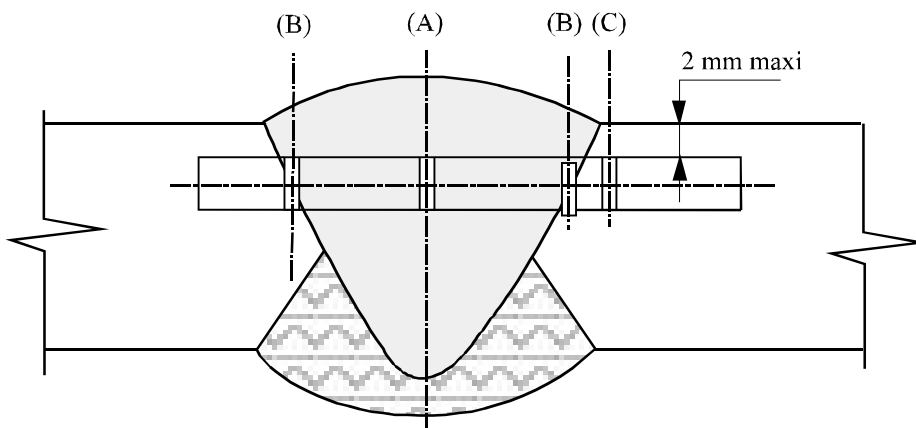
Charpy V-notch tests in main welds
